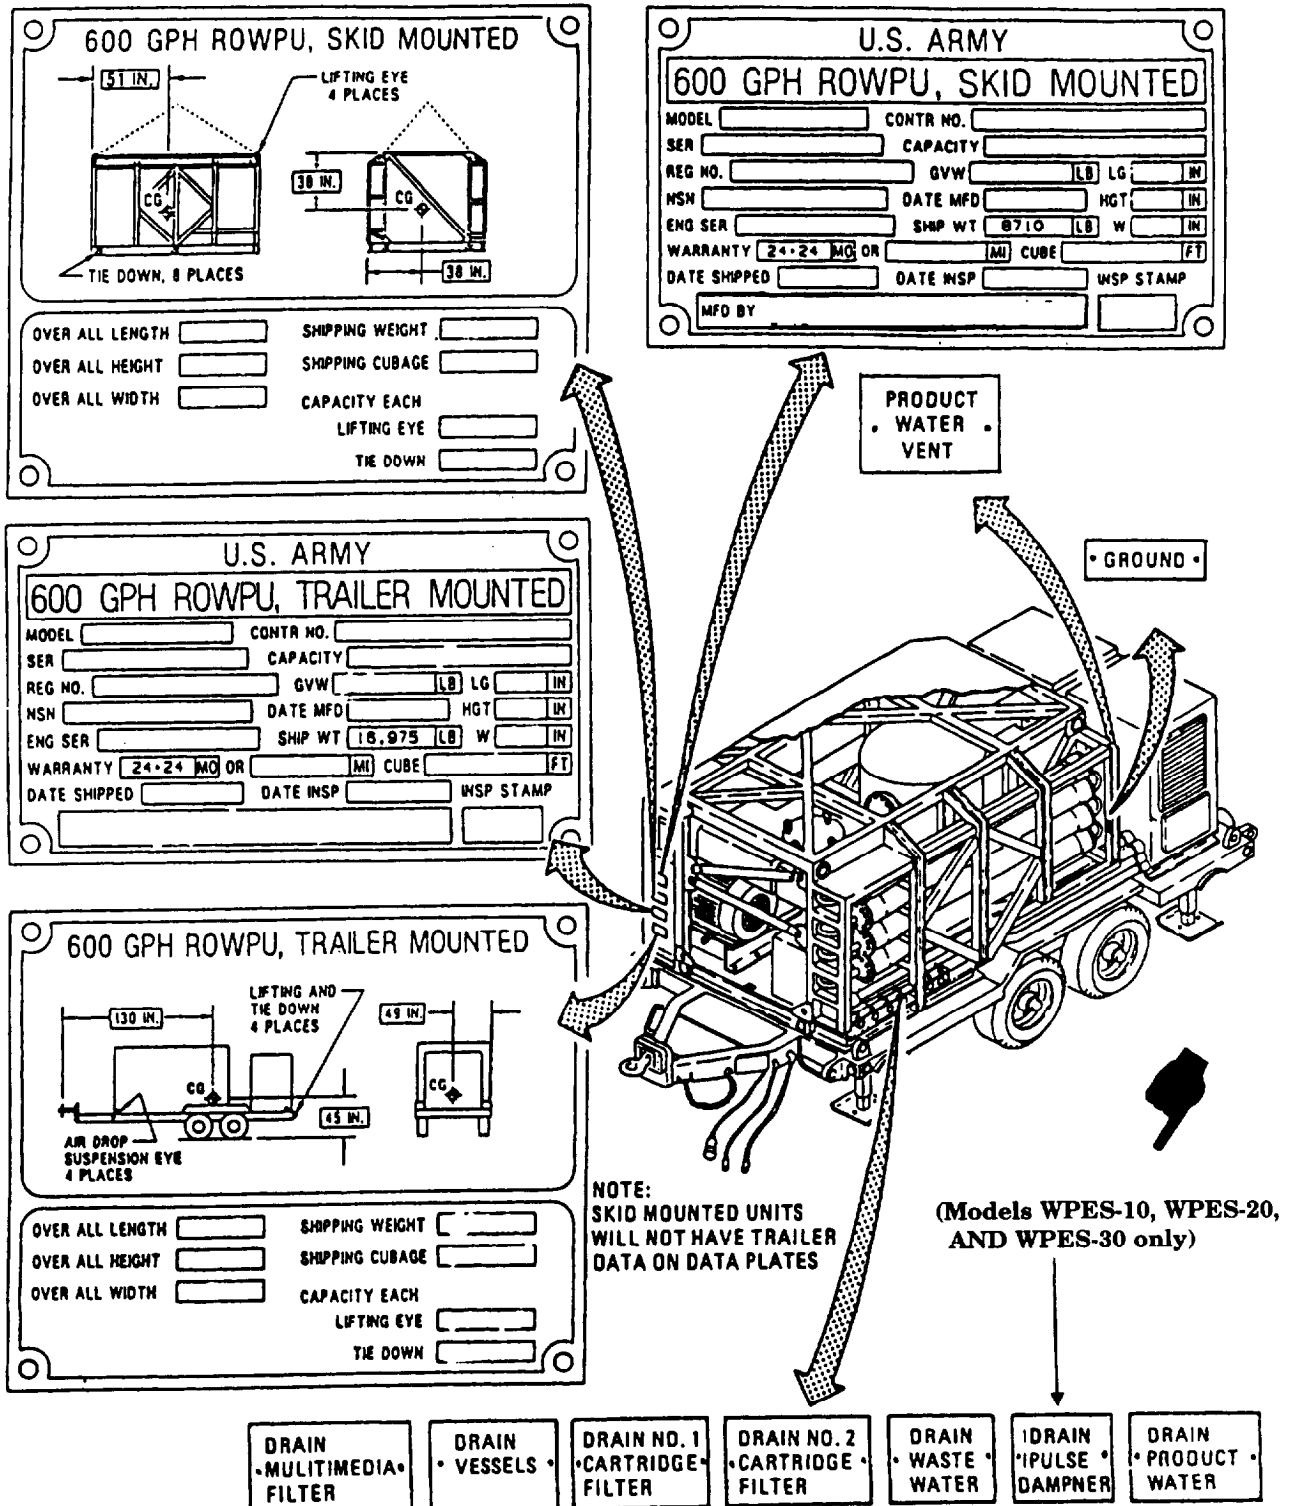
Decals and Instruction Plates (sheet 5 of 6).
